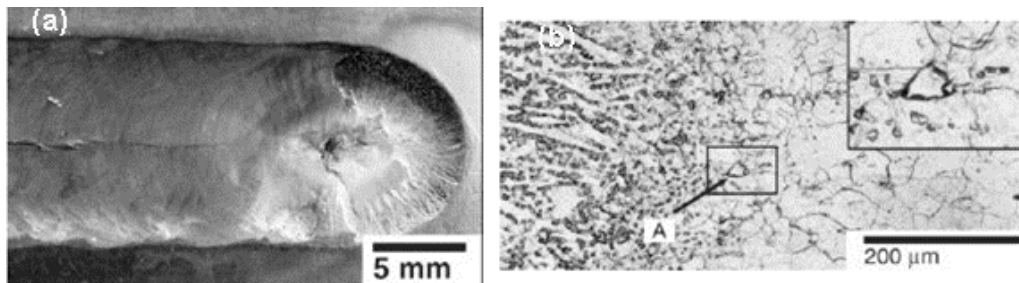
(a) Example of solidification cracking in IN718 during gas tungsten arc welding (GTAW) and (b) Example of hot tearing in IN718 during GTAW.
